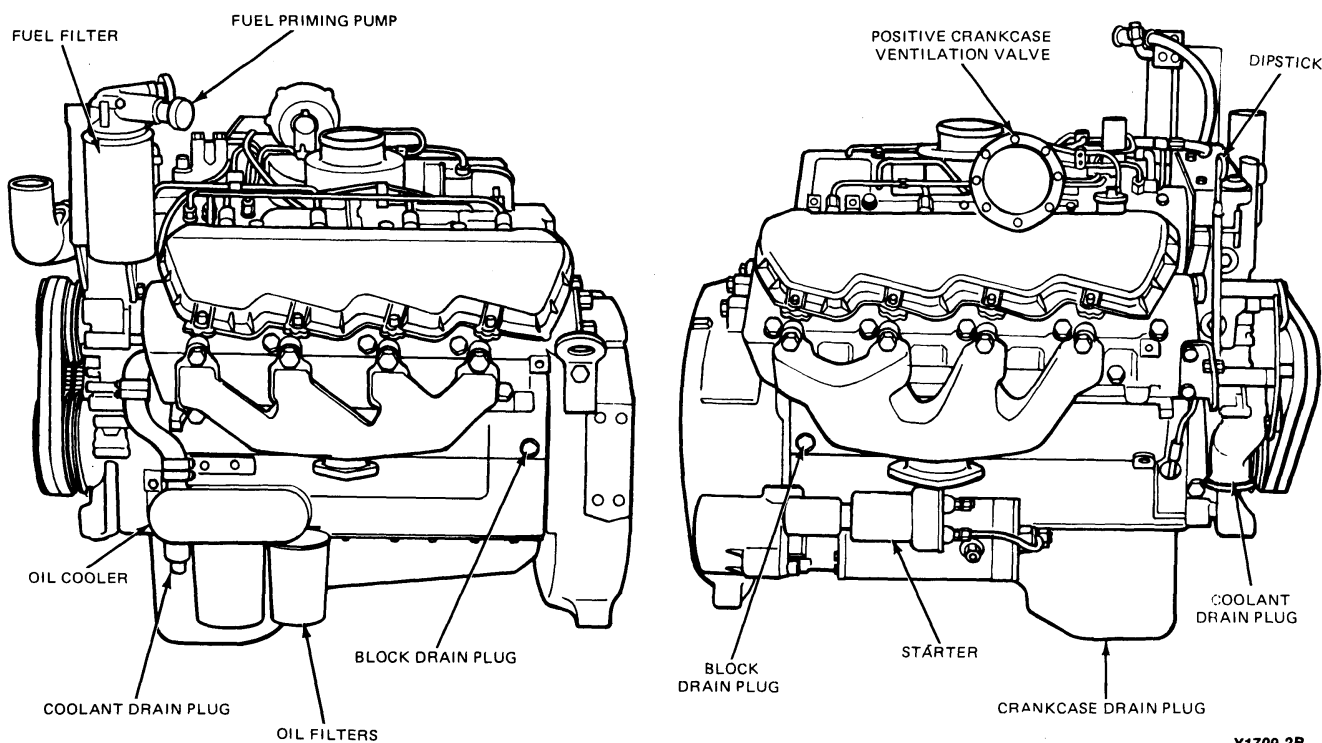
Caterpillar 3208 V-8 Diesel Engine Service Points
